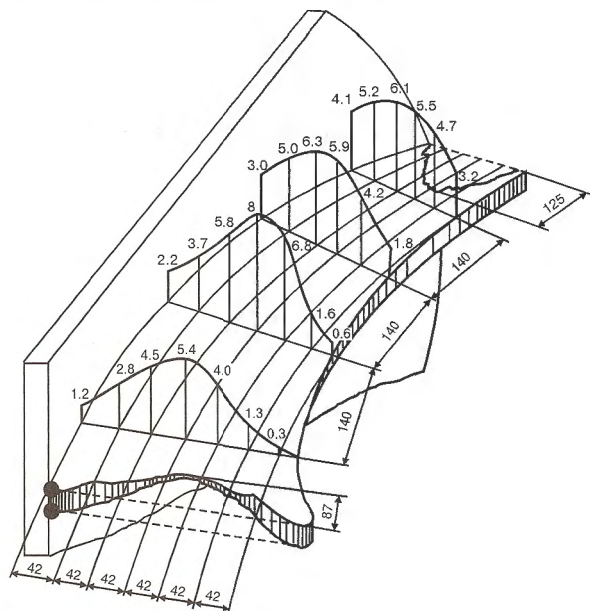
Mode of fracture of an unclad blade of VM-180 mill exhaustor fan transporting coal dust (vertical lines show the linear wear values in mm)
